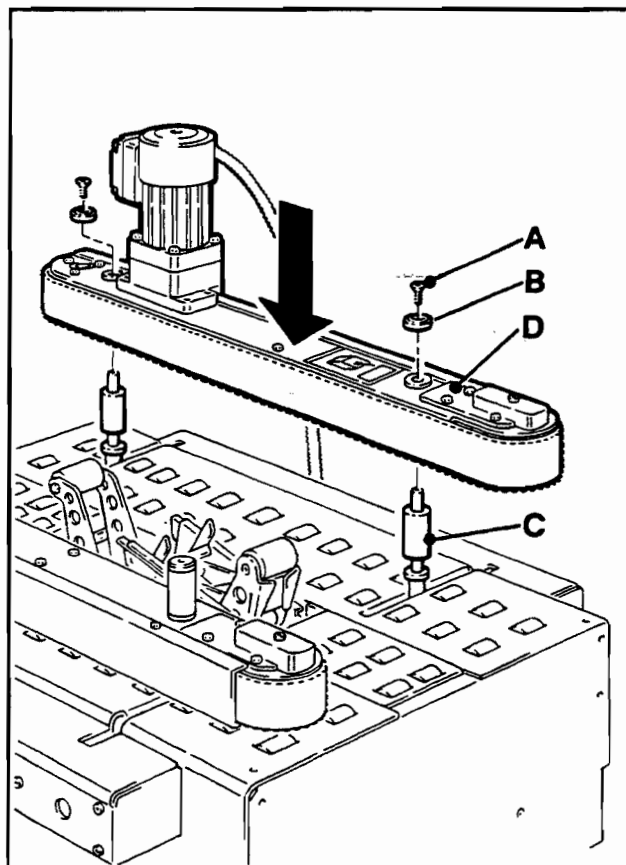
Drive Belt Assembly – Case Sealer Reassembly
